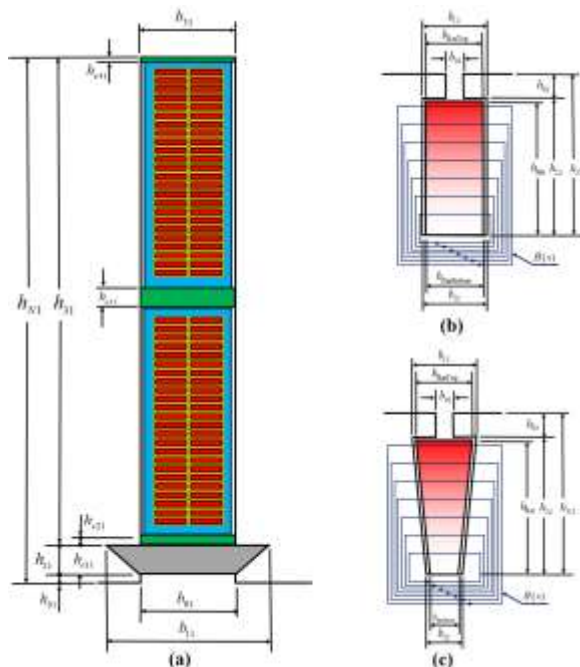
Stator and rotor slots dimensions – a) Stator - b) Typical LIC motor - c) High Torque LIC motor.
